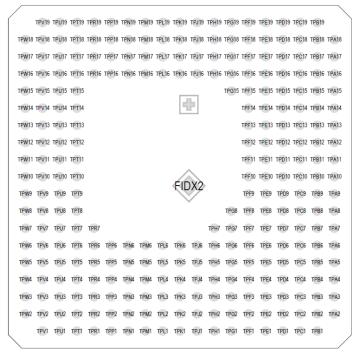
TQMa91xxLA, LGA pad numbering scheme, bottom view
